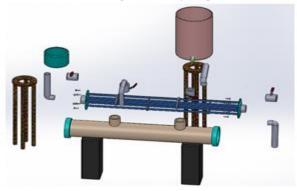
Exploded view of the Shell and Tube Heat Exchanger laboratory setup.
